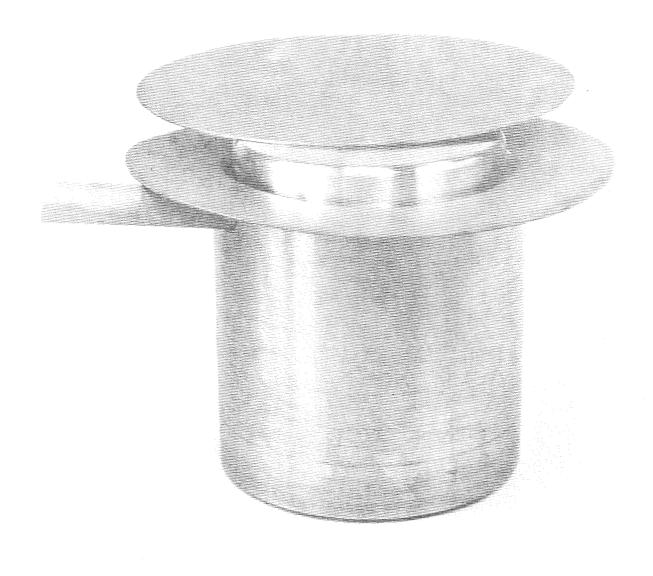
Final Simulated Impeller Sample Showing Pre-Bond Assembly After Lay Up Prior to Welding of Retort
